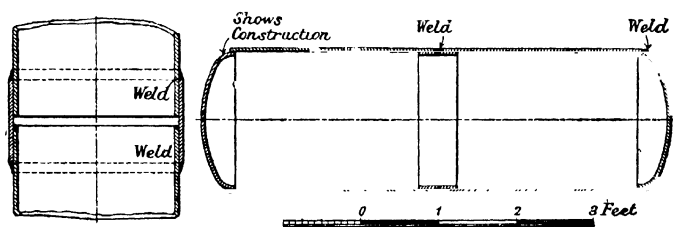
EXAMPLE OF STEEL BARREL WELDS.
